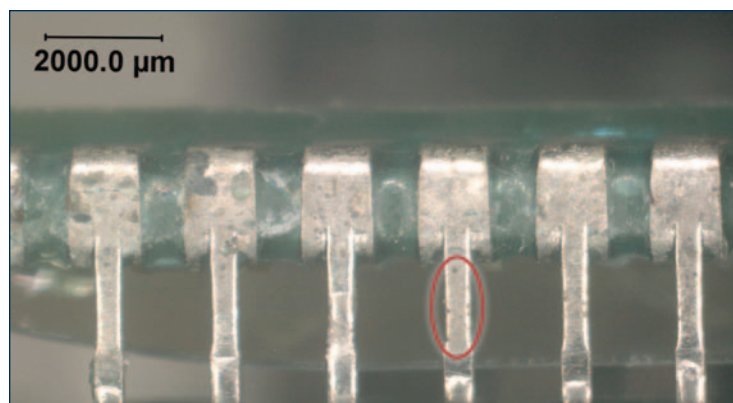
Pitting corrosion observed along the pins of the component.
